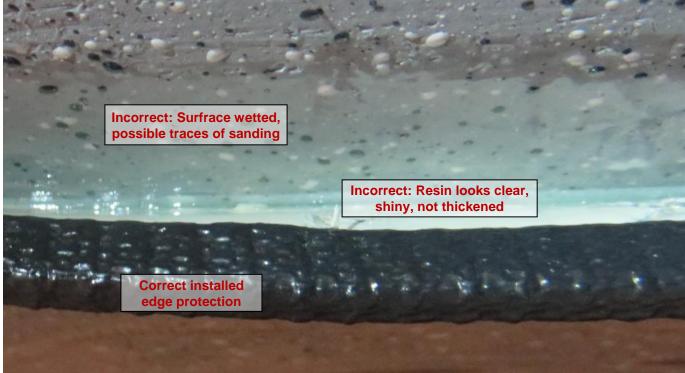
Sample view a wrong installation showing examples of the listed details
